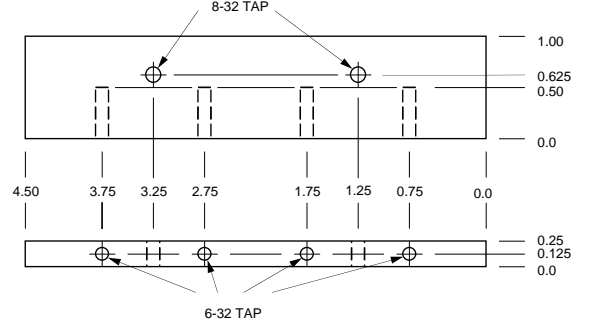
SPCM base adapter plate. Units: inches, all tolerances are ± 0.01 inch unless otherwise specified.
